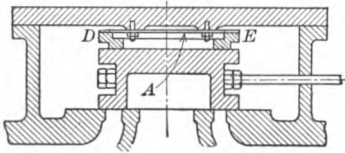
FLEXIBLE TYPE OF PRESSURE-PLATE VALVE
